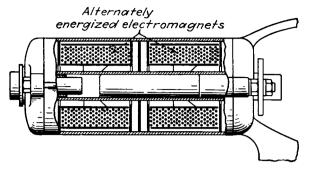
The striker has no mechanical connection with the reciprocating drive in this hammer.
